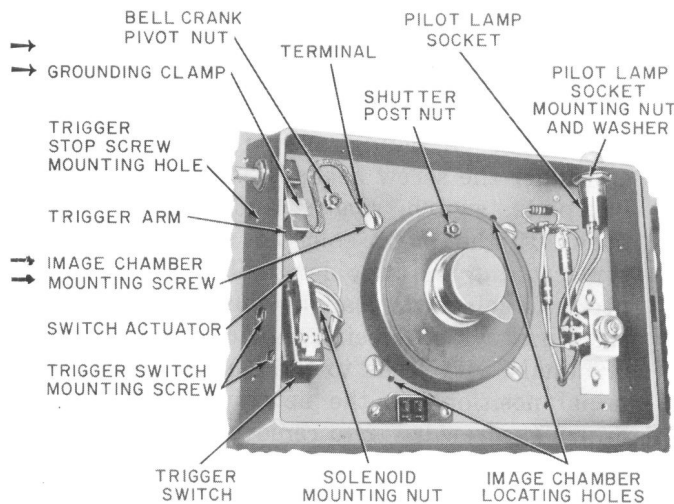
KS-14593 L2 Message Register Camera — Partial View with Hood Removed
